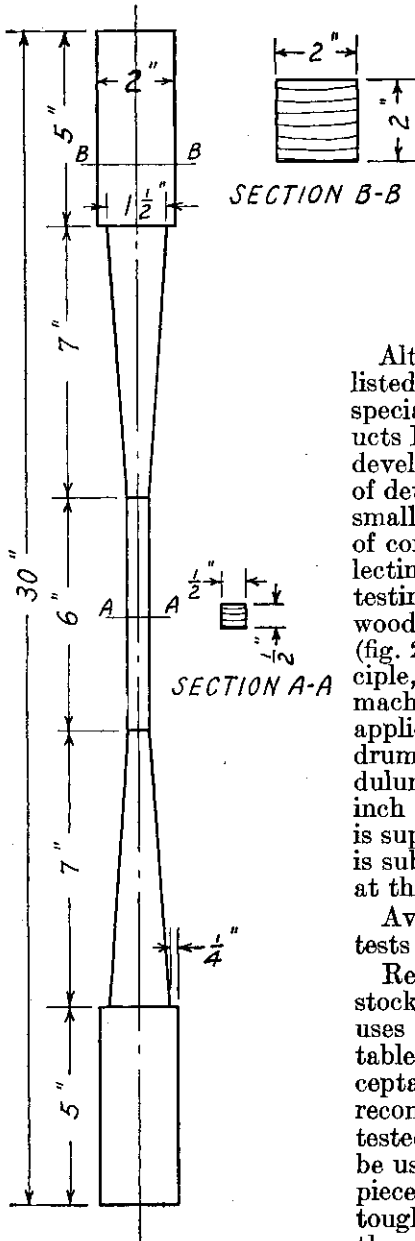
Details of tension-parallel-to-grain test specimen.
